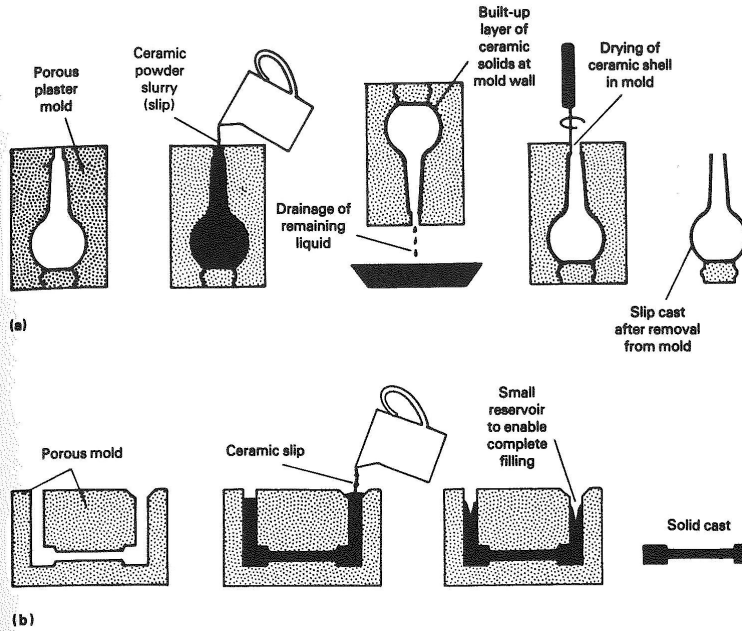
Ceramic slip casting process. (a) Drain casting. (b) Solid casting
